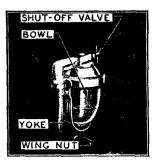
To remove the filter bowl for cleaning the screen, close the shut-off valve, loosen the wing nut at the bottom and disengage the supporting yoke.
